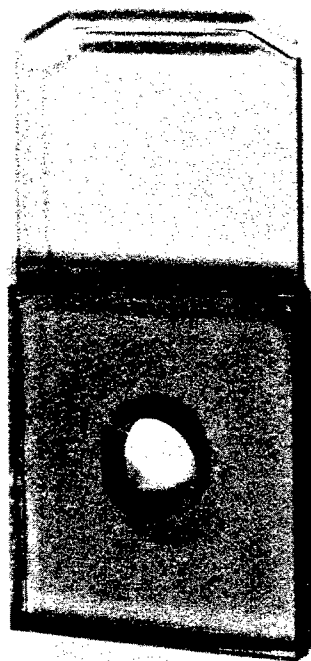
Photograph of Failed Sharp Edge-Notch Specimens
